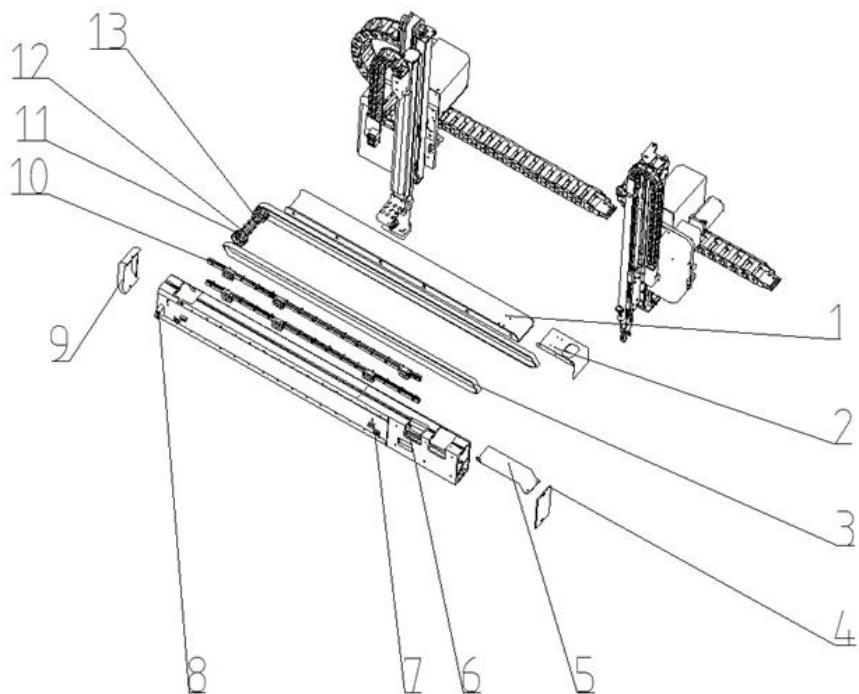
ST5-T: Crosswise unit (telescopic arm) exploded view
